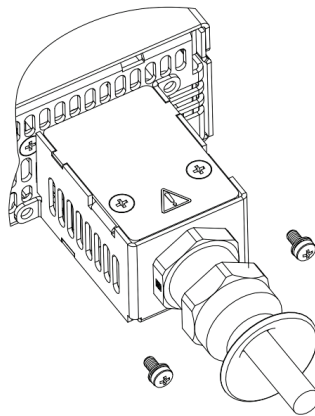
Strain Relief Assembled to Power Supply Rear Panel
